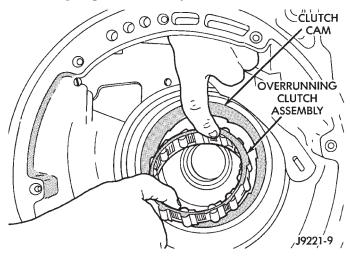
Removing/Installing Overrunning Clutch—46RH
